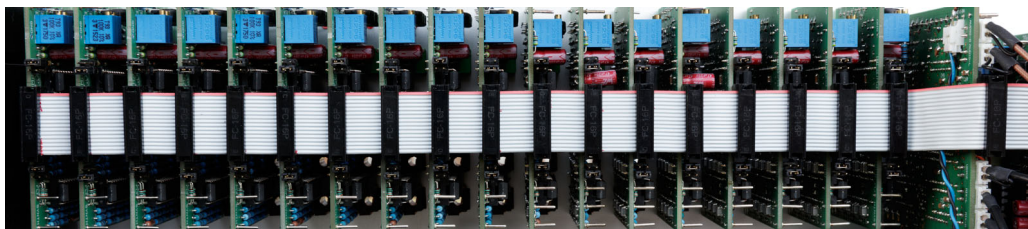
Installation of the ribbon cable on all assembled channel filter boards. The output board sits on the right.
